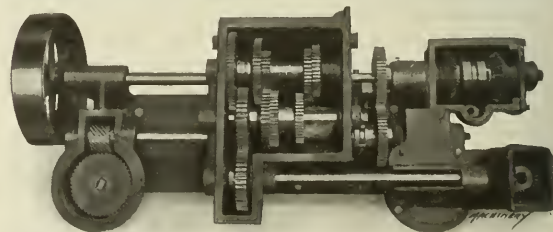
Gearing in Speed Box of Newton Multiple-spindle Milling Machine
